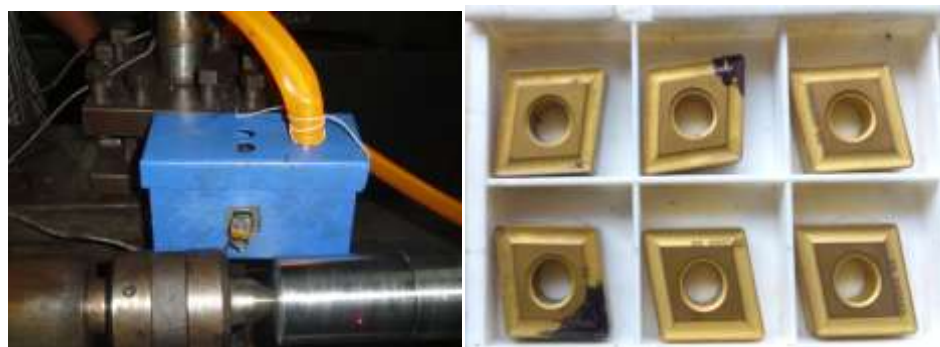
Cutting Tool (CARBIDE INSERT)
